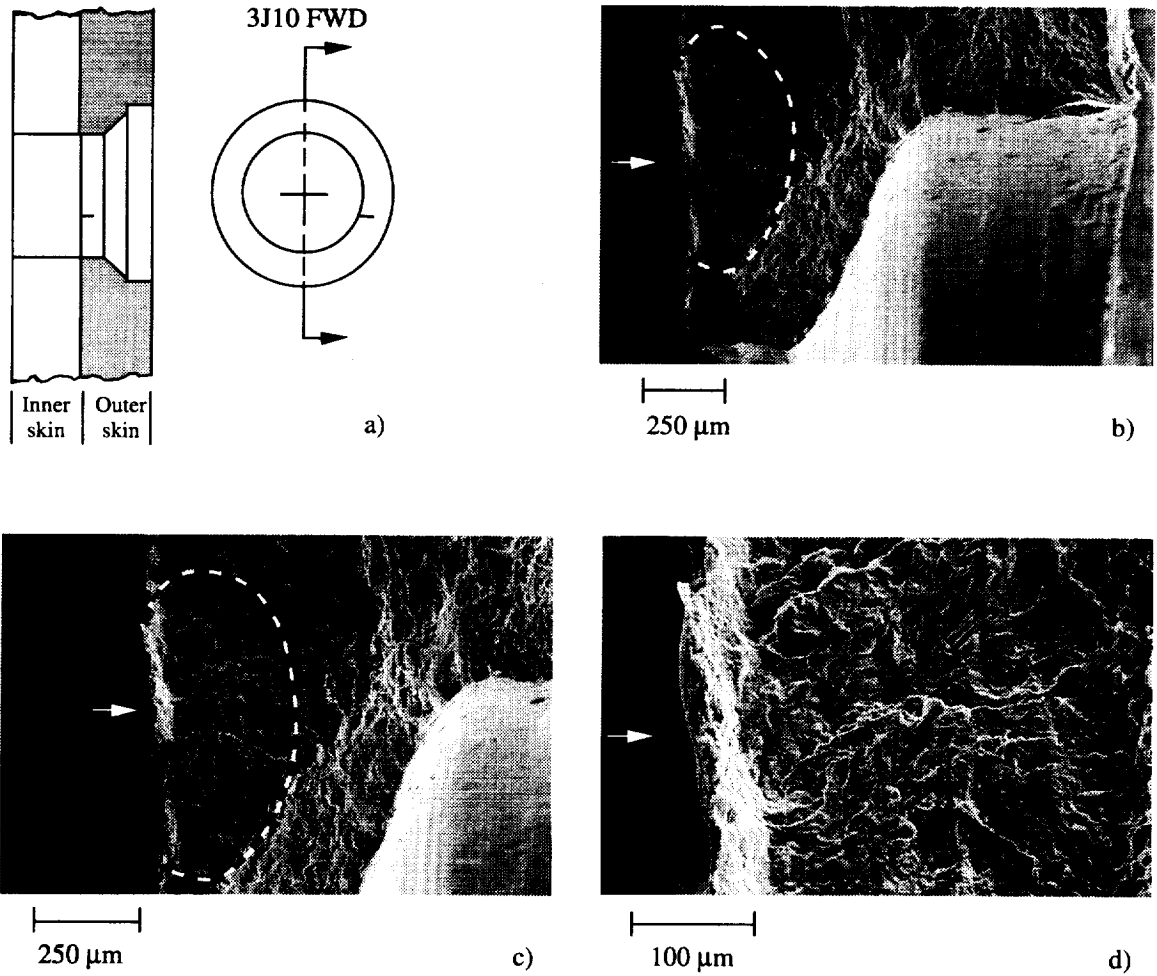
a) The schematic shows the rivet hole 3J10 configuration and the location of the outer skin fatigue crack oriented in the forward direction and about the 4 o'clock position. b) The SEM micrograph shows the faying surface fatigue crack at the rivet hole (bottom). The arrow identifies the likely crack initiation region along the faying surface and the dashed line marks the fatigue crack front. c) The SEM micrograph shows the faying surface fatigue crack fracture surface and the region of crack initiation (arrow). d) The SEM micrograph shows the rough faying surface at the site of crack initiation (arrow).
